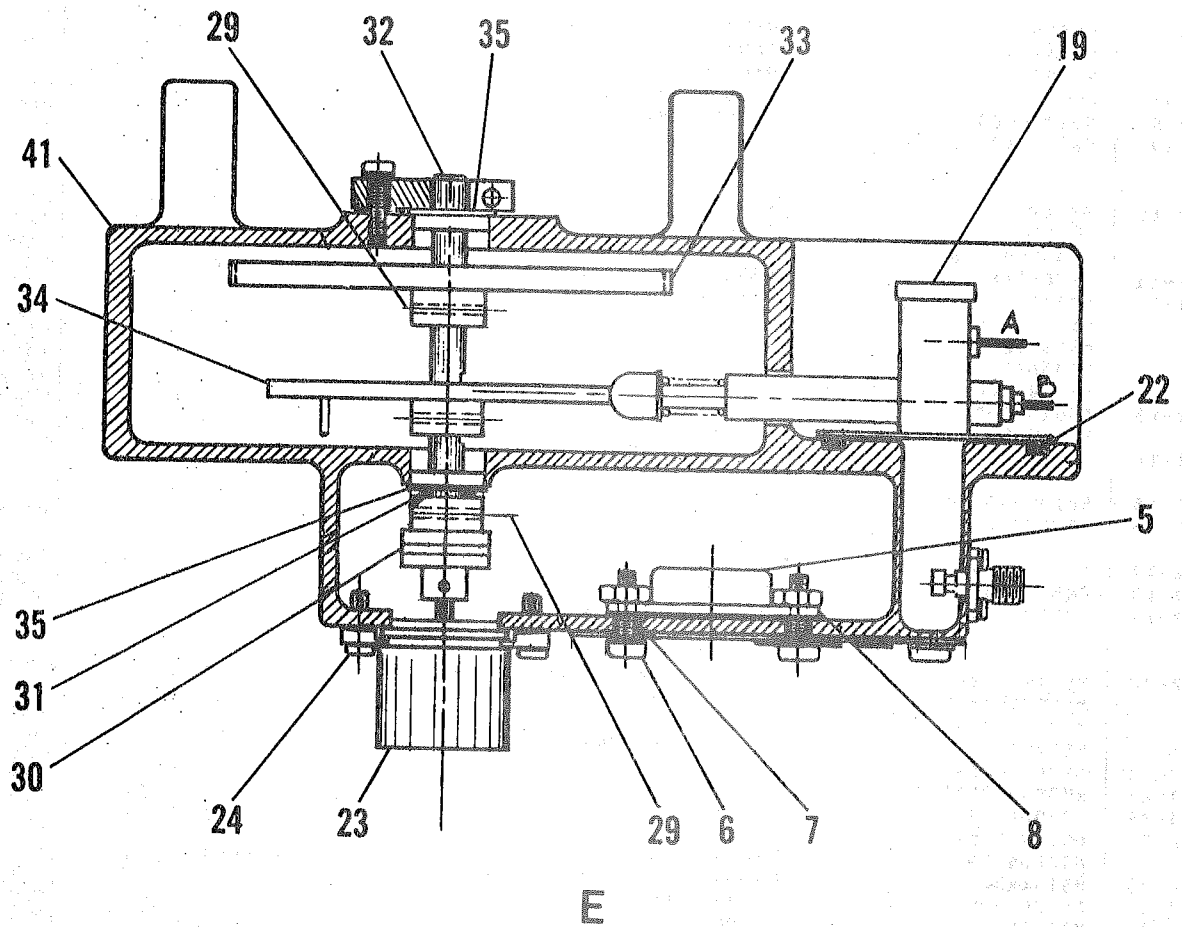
RF Oscillator Assembly (Sheet 3 of 3)
